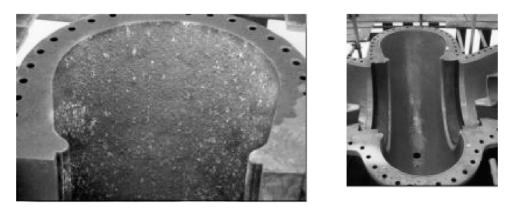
Surface of a Pump Casing before and after a Finished Coat
